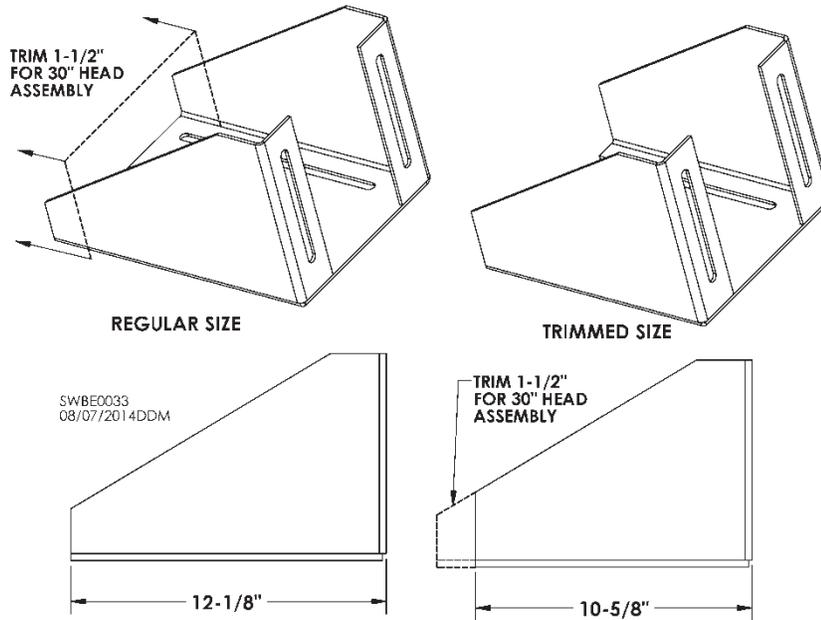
Trimming belt shield mounting bracket for 30" pulley head w/ TA1107 or TA2115 reducer
